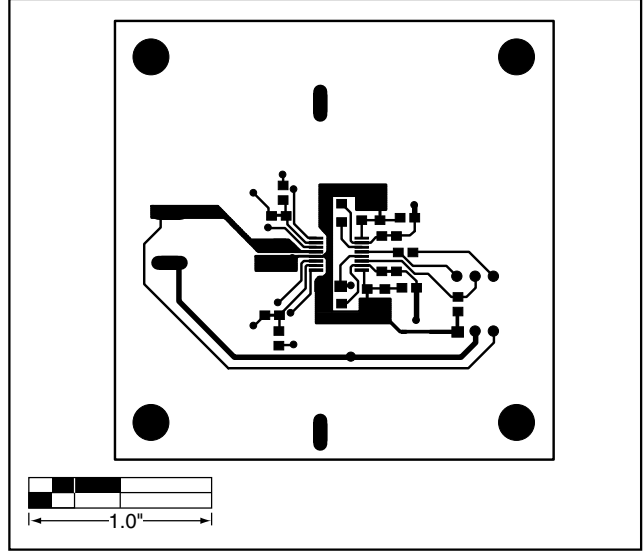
MAX1761 EV Kit PC Board Layout—Solder Side
